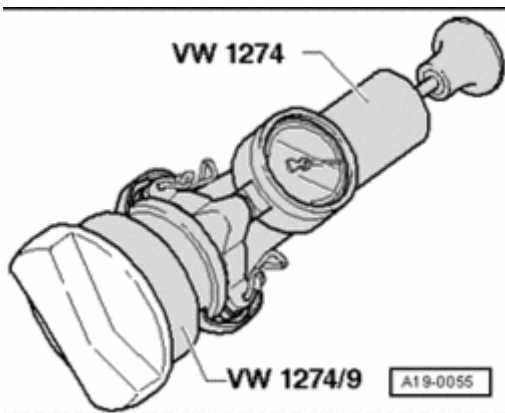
Attaching VAG1274 Cooling System Tester Together With VAG1274/9 Adapter To Filler Cap
